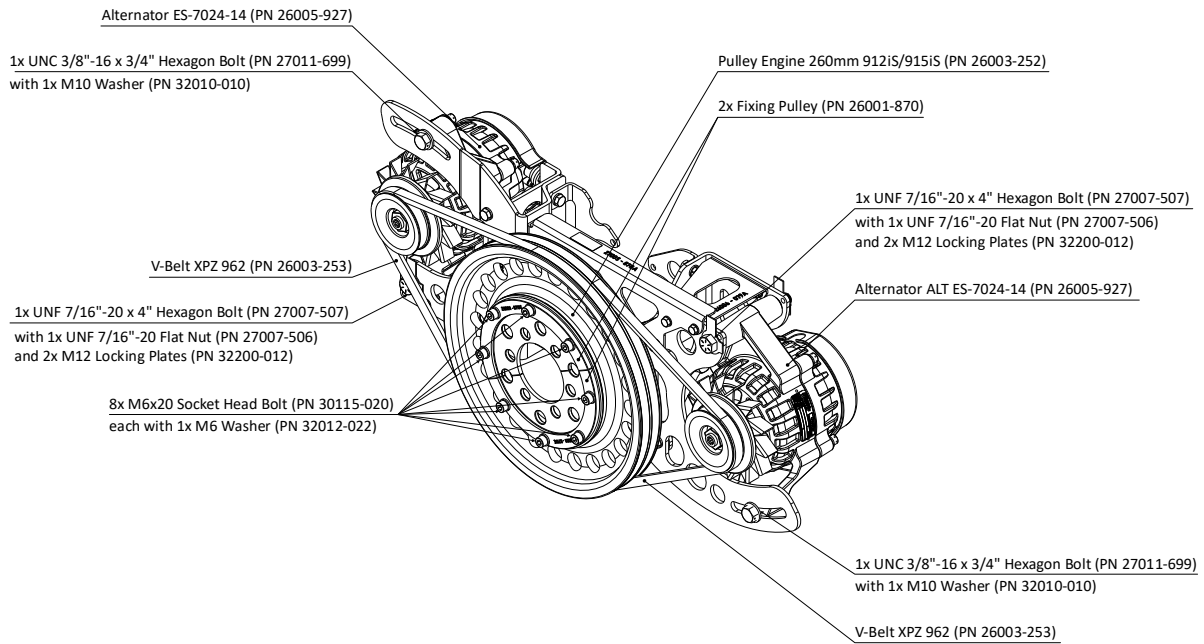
Isometric View Ext. Double Alternator Kit 2x 70A Rotax 912iS
